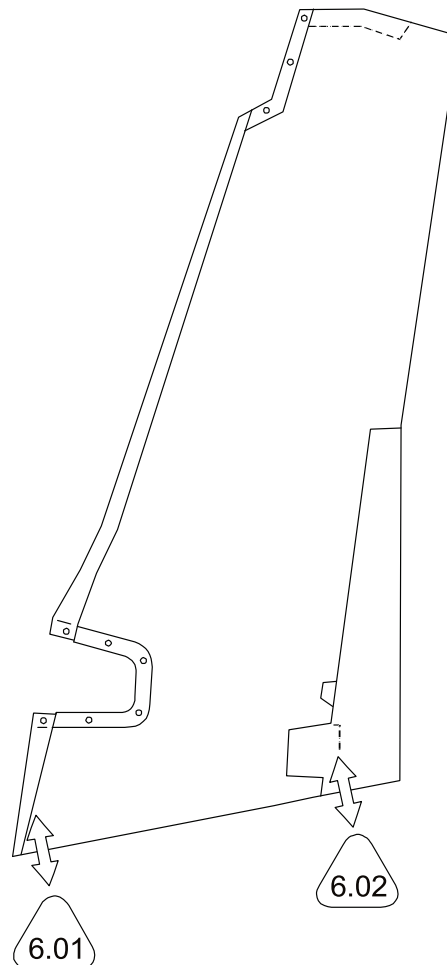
Drain Holes - Horizontal Stabilizer, Elevator and Elevator Trim Tab
